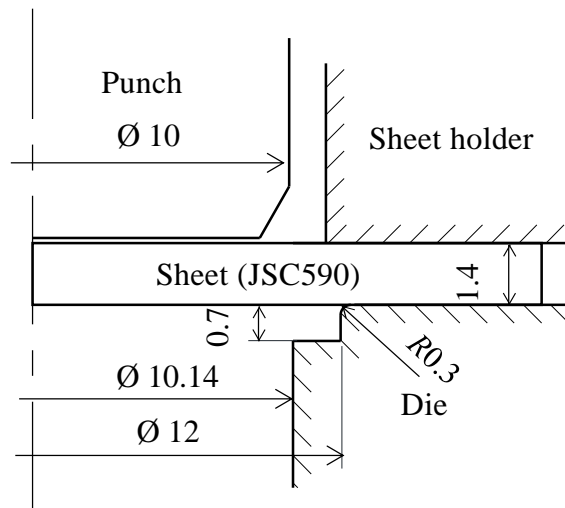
Dimensions of tools used in punching process of high strength steel sheet.
